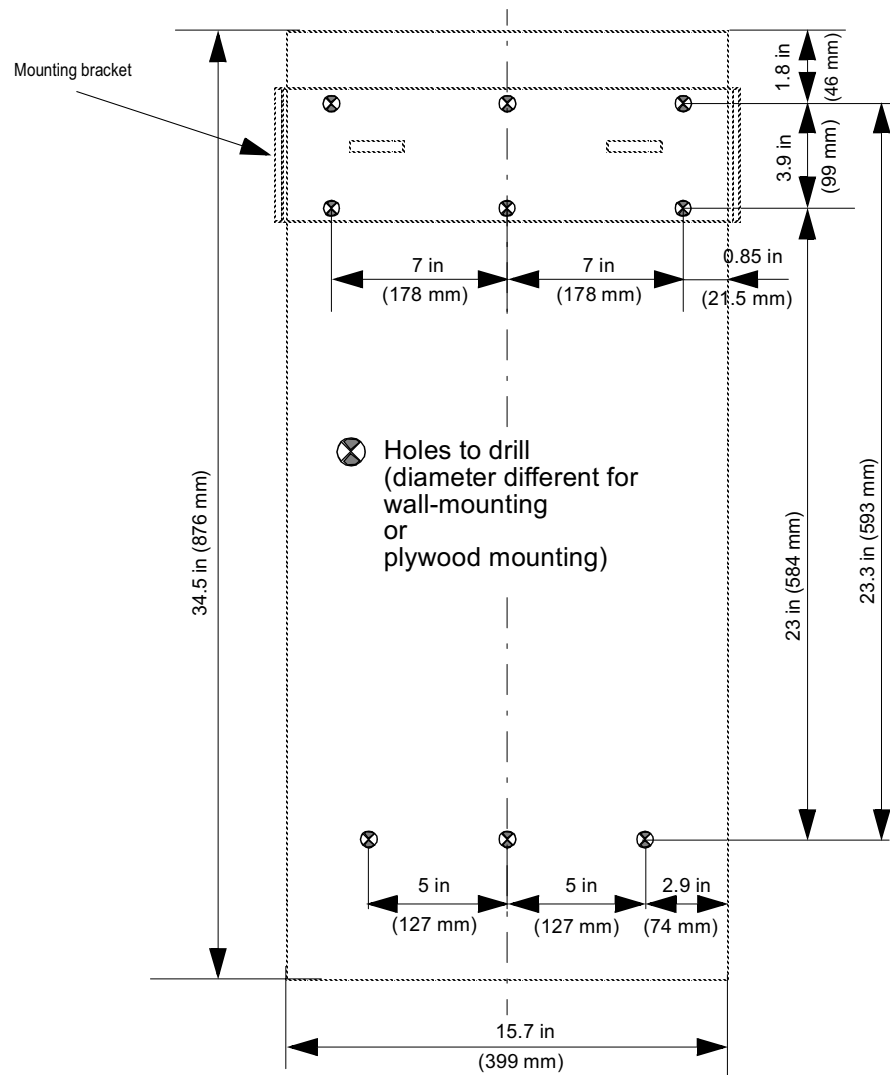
Drilling template for wall-mounting/plywood-mounting
